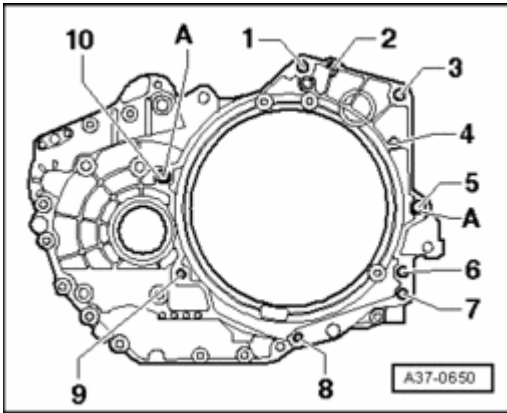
Identifying Bolts On Engine/Transmission Flange
